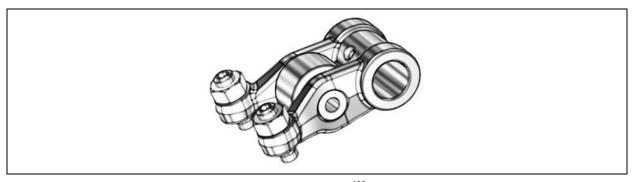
Cam Follower with Adjusting Screws (XY150)¹⁸⁸
